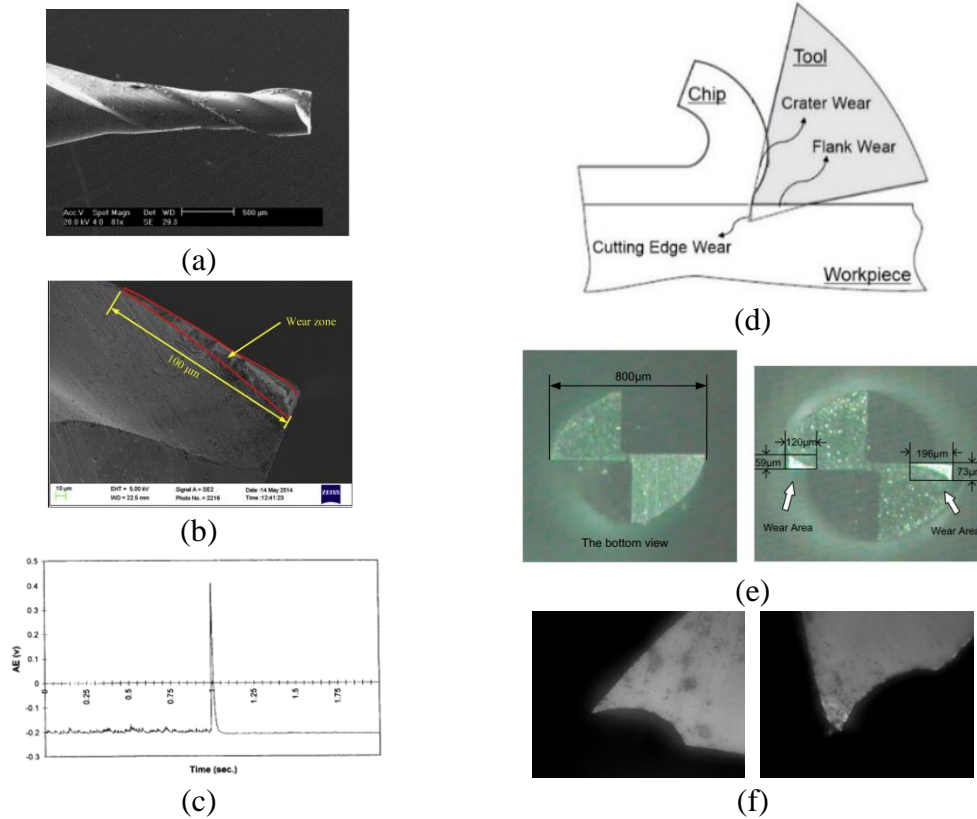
Micro-endmill and tool conditions (a) 2-flute 500 μm Micro-endmill [8], (b) tool wear along the flute of the micro-endmill [9], (c) AE signal from tool breakage [10], (d) schematic of tool wear, (e) flank wear [11], (f) cutting edge wear.
